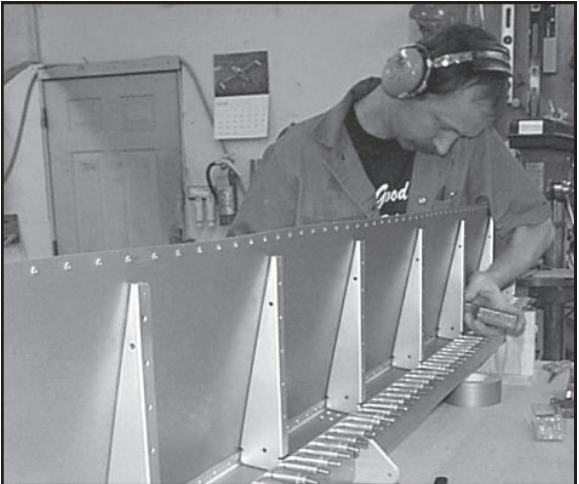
Riveting the aft top skin to the ribs and spar.
